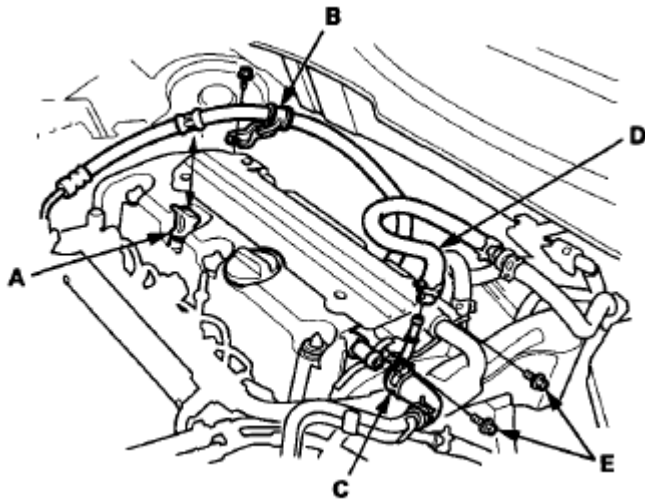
Identifying Dipstick, Power Steering (P/S) Hose Bracket, Breather Hose And Brake Booster Vacuum Hose
